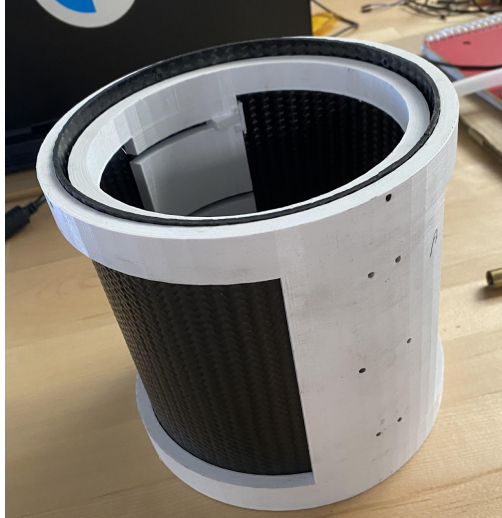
shows the carbon fiber cylinder inserted into the drill guide, notice the spaced guide holes in the plastic.
